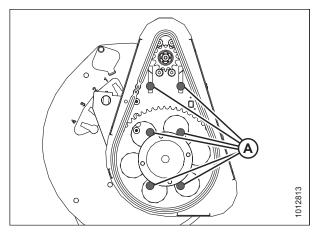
Single-Reel Drive Shown – Double Reel Similar
